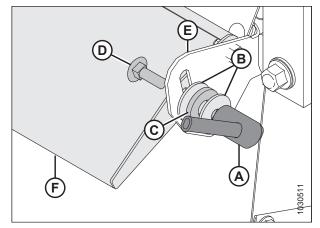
Baffle Handle – Right Side Shown, Left Side is Opposite
